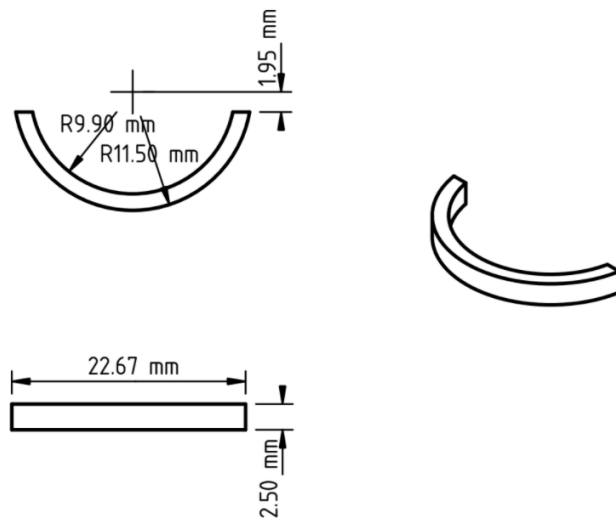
Drawing of a C-shaped piece of the outer shell that was manufactured. Eleven such pieces will be stacked (with laser cut pieces of shim stock providing the airgap spacing) to form one half of the outer shell.
